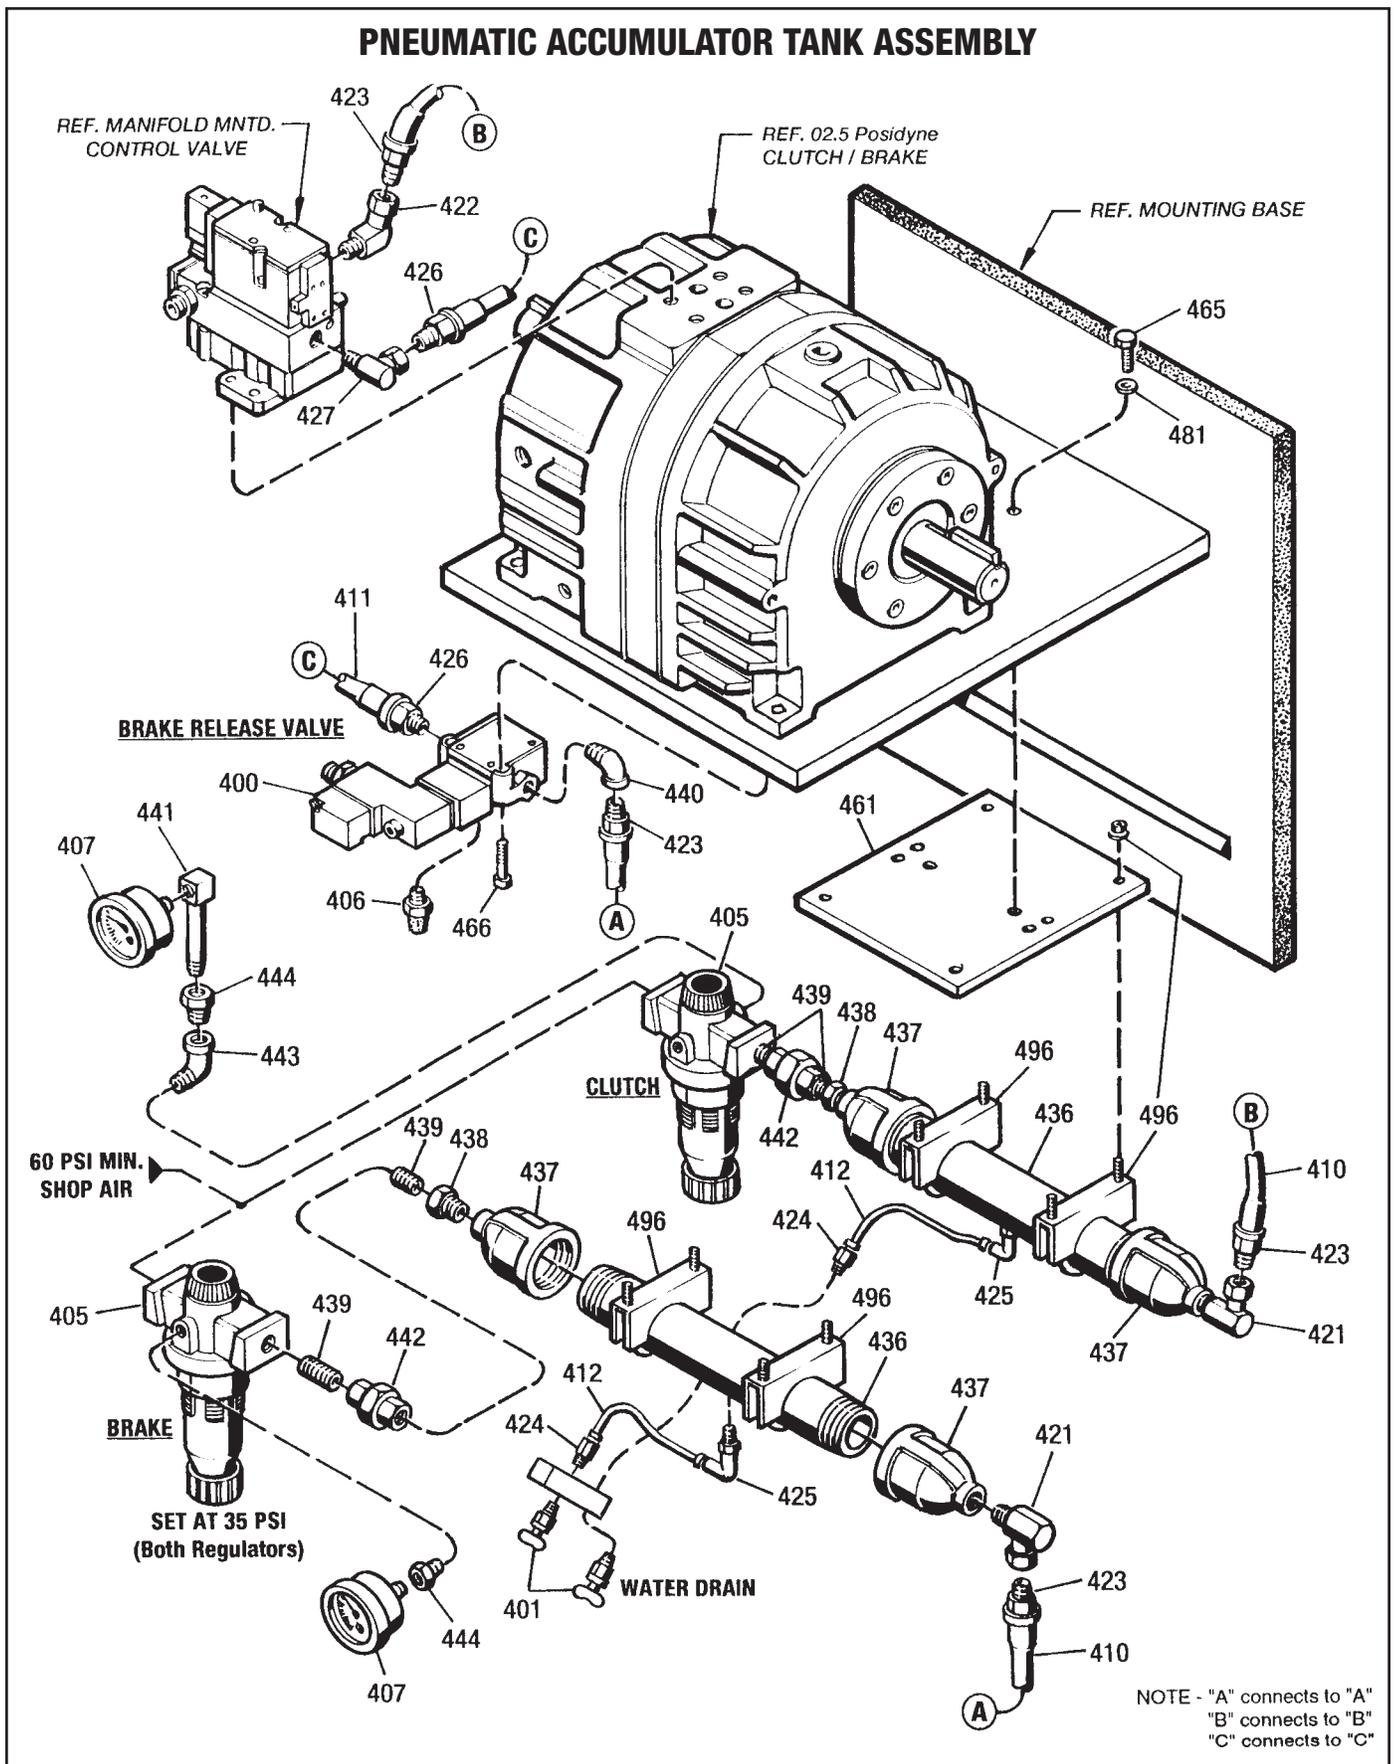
Pneumatic Accumulator Tank Assembly
